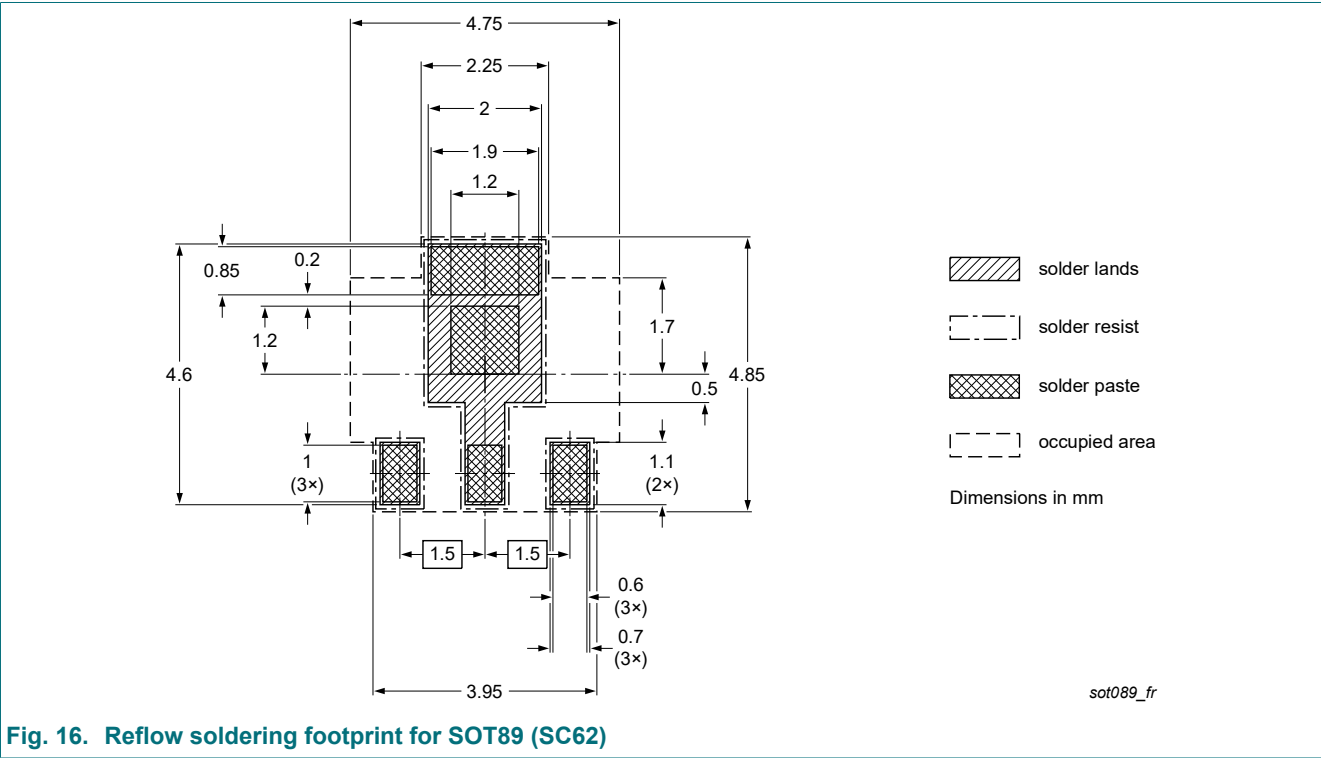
Reflow soldering footprint for SOT89 (SC62)
